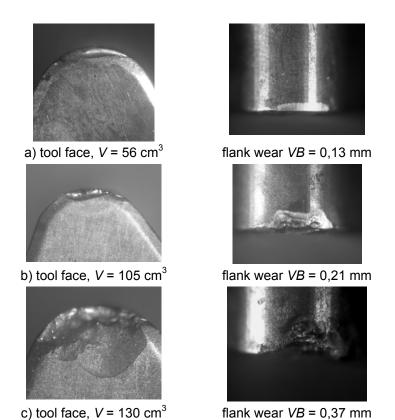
Photos of tool wear, real dimension of the figures 1,5 x 2 mm Obr. 16 Fotografie opotrebenia nástroja, skutočný rozmer 1,5 x 2 mm
